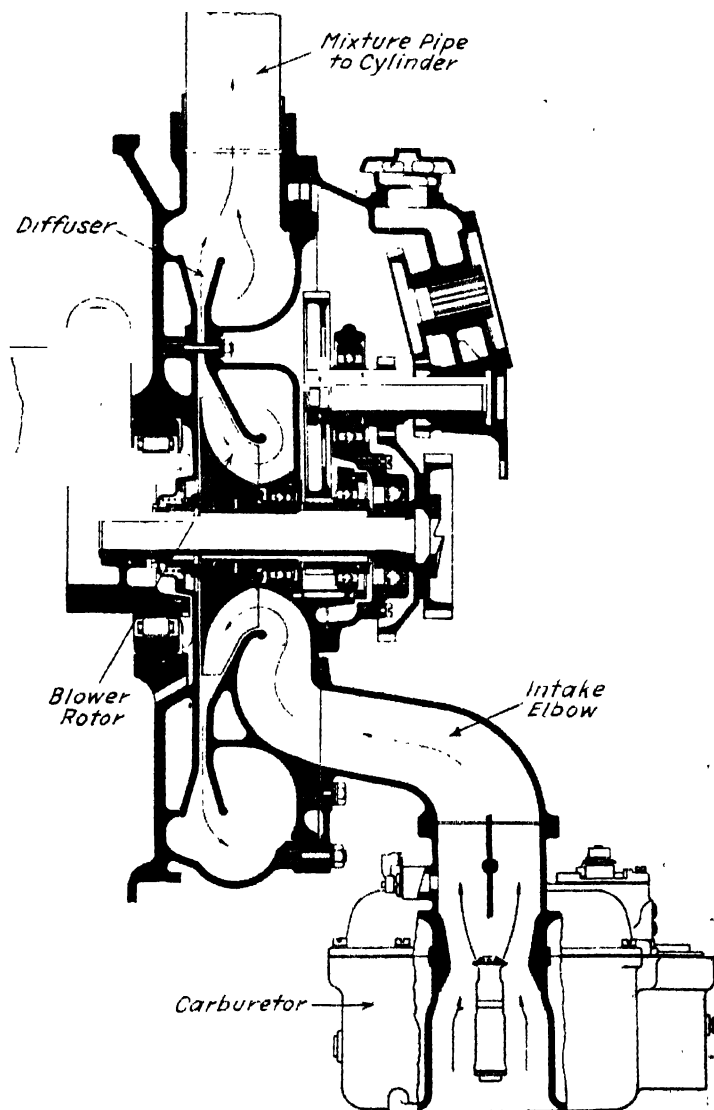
Drawing Showing GE Centrifugal Supercharger and Method of Rotor Drive Used on Wright "Cyclone" Engine.
